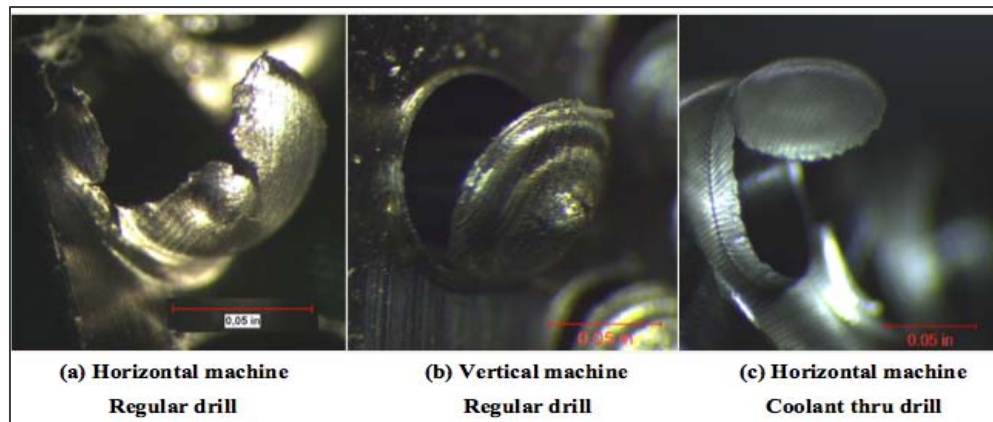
The drill caps created during current manufacturing process (a), vertical machining (b) and, using coolant thru drill (c)
